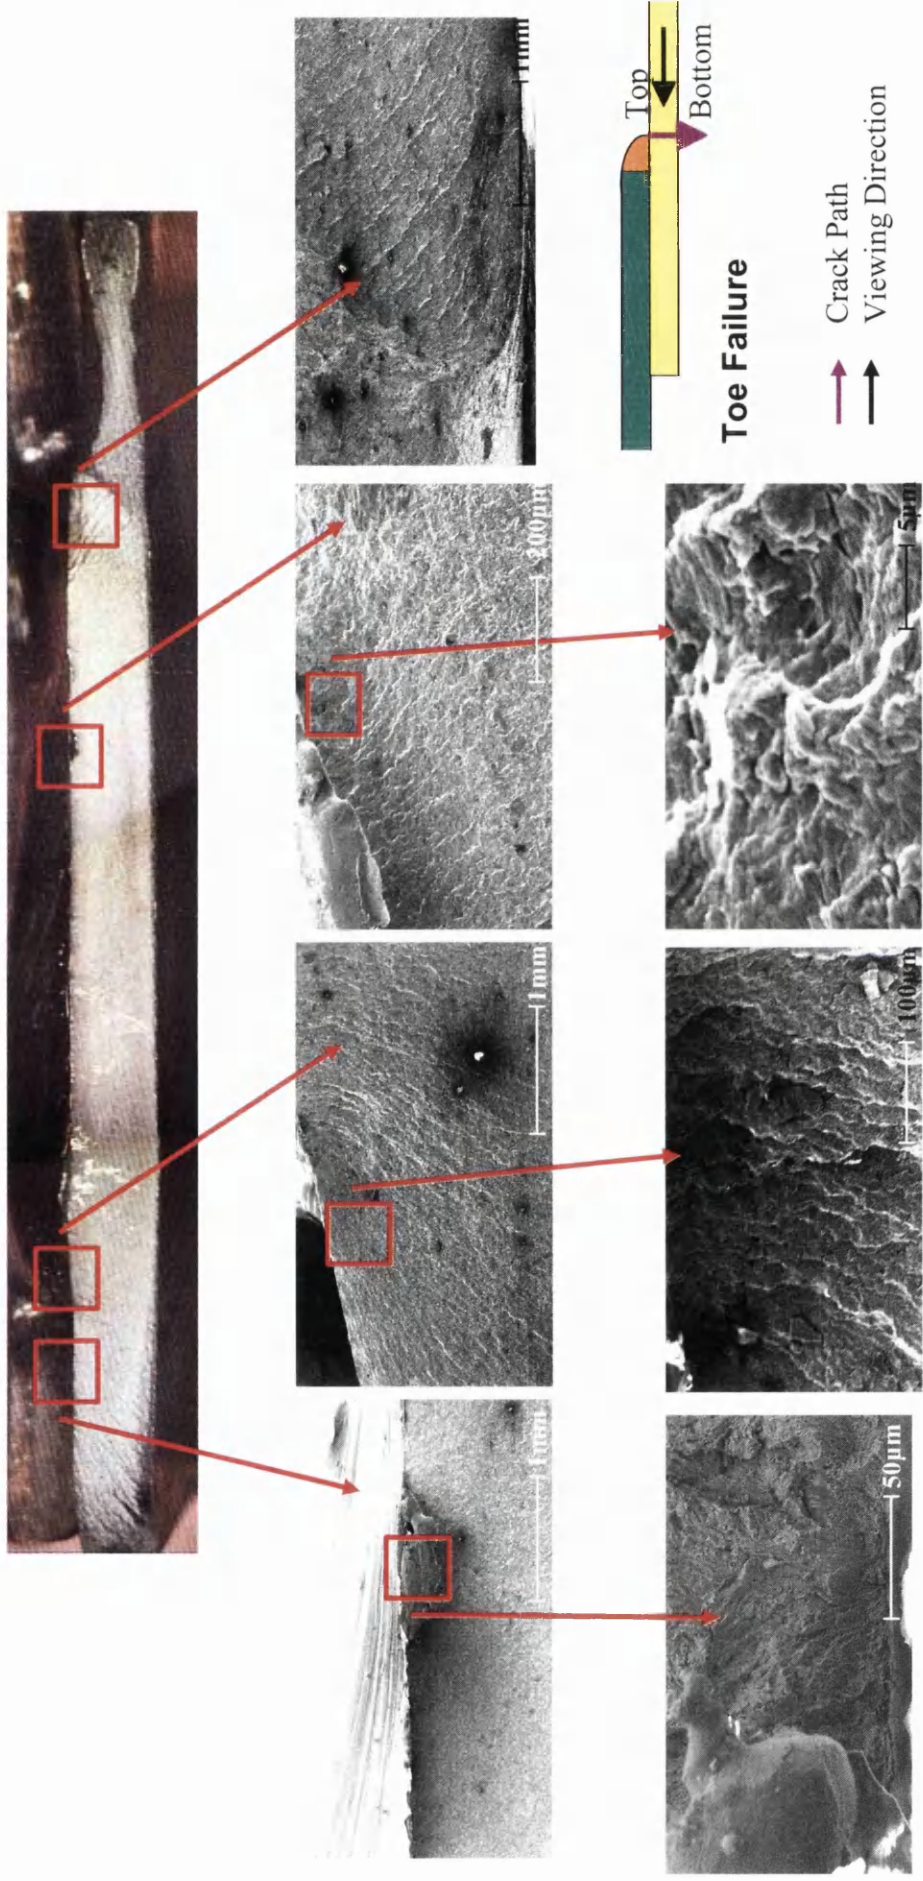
Typical Fracture Surface for TM11A Weld Toe Failure – Weld View
